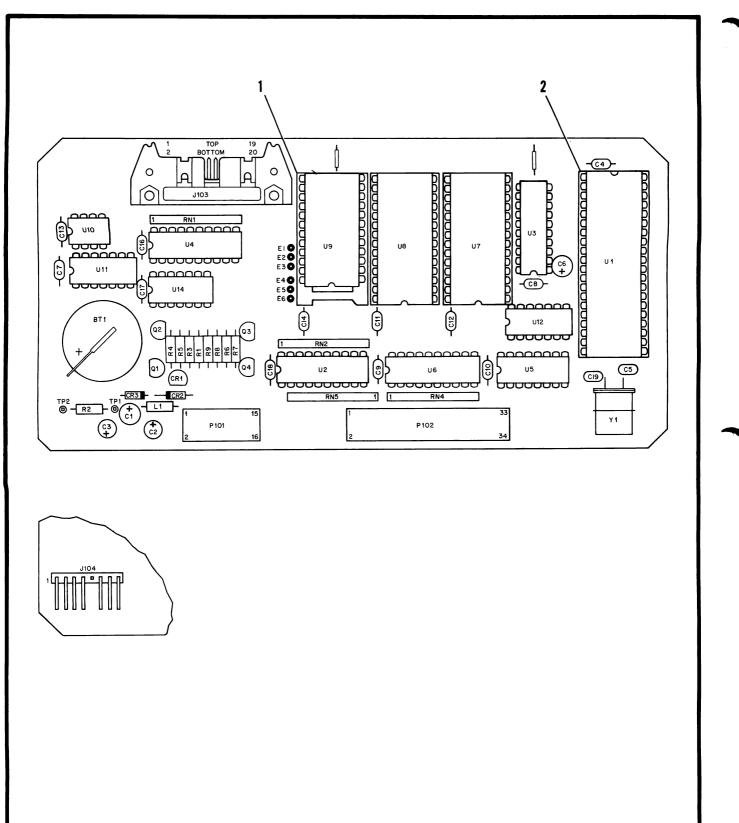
PROCESSOR PC BOARD ASSEMBLY
